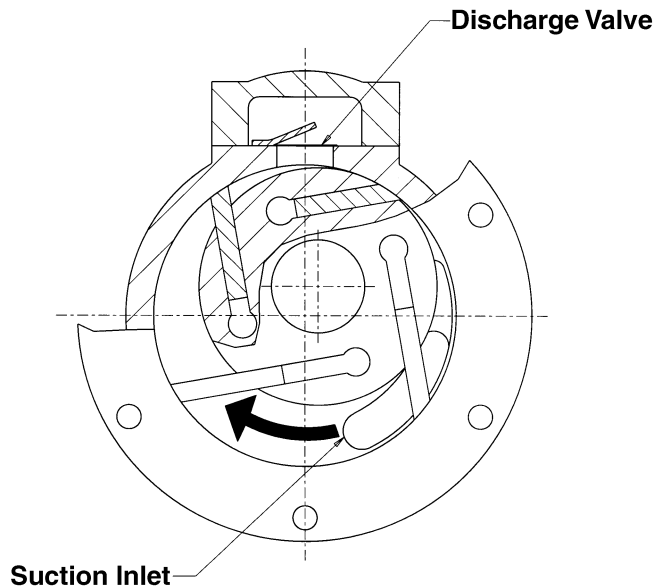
Cross-sectional drawing of a typical rotating vane rotary compressor. (Courtesy of the Copeland Corporation, Sydney, OH.)
